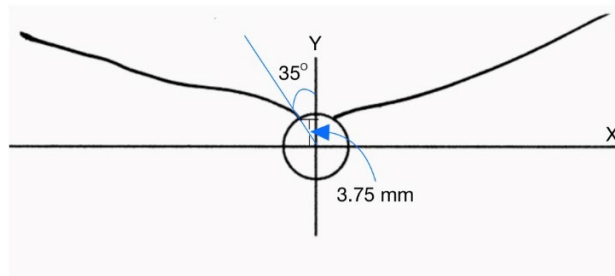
Template with fracture profile of P5 with 5 mm bolt (specimen 1)
